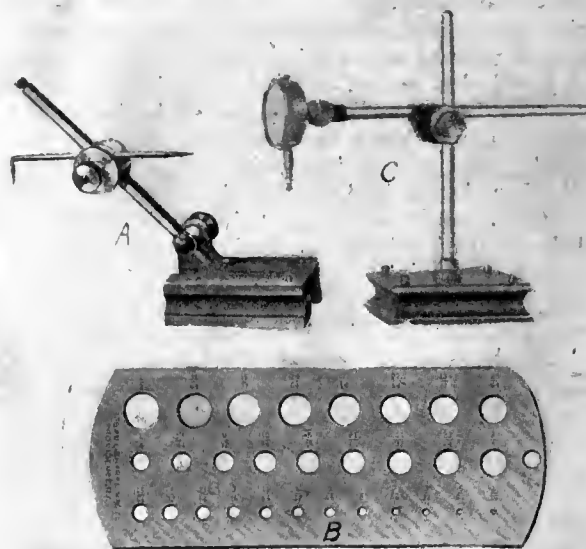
(a)—SURFACE GAUGE; (b)—DRILL GAUGE; (c)—SURFACE TEST INDICATOR GAUGE.
